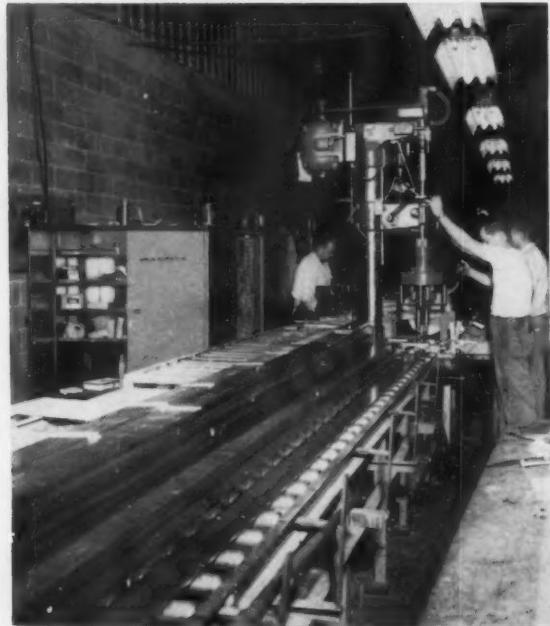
PARALLEL CONVEYORS, each 42 ft long and 32 inches high, connect storage rack to fabrication and assembly line. Uncrated bus rests on 13-in. wide feeder conveyor; single bars ride 7-in. wide conveyor (front).
